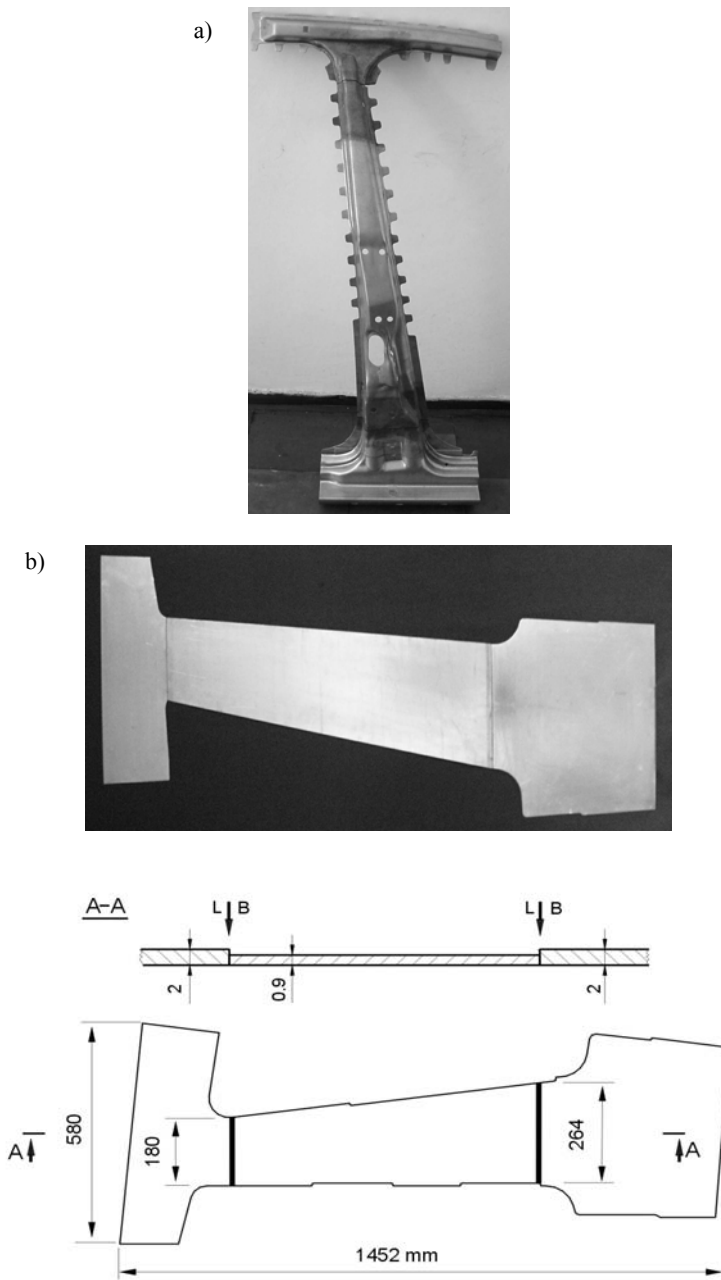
Welded pass of laser-welded tailored blank: (a) the picture of the final form of a drawpiece-center pillar in Audi A3, (b) after the process of forming
